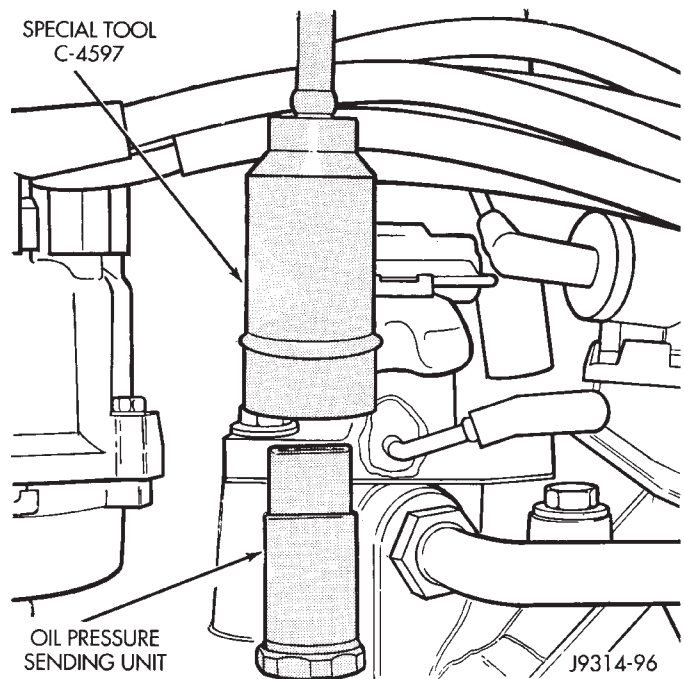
Oil Pressure Sending Unit—Removal/Installation
